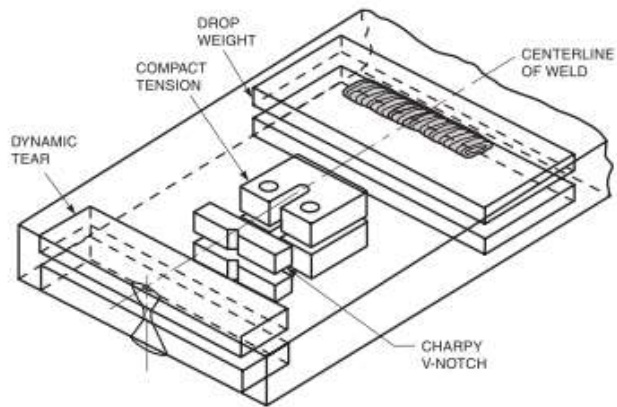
Orientation of Weld Metal Fracture Toughness Specimens in a Double-Groove Weld Thick Section Weldment
